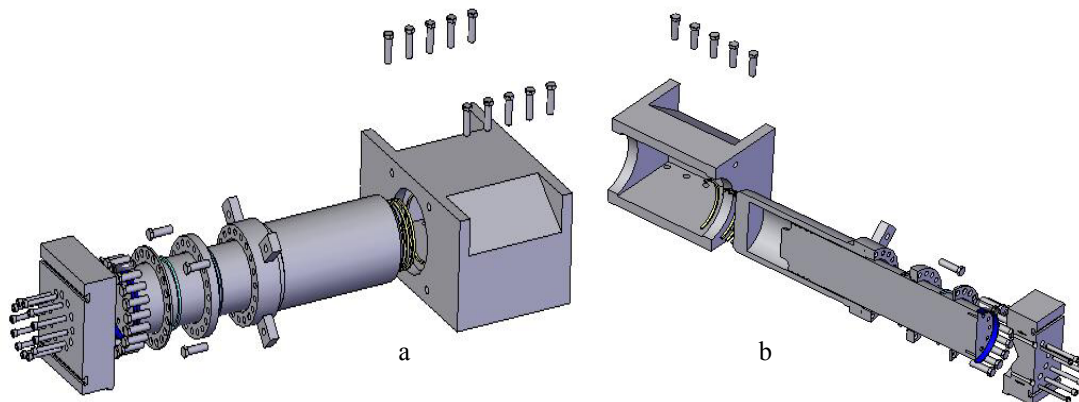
3D exploded representation of: a) the hydraulic element force from horizontal Hydraulic Press – 2 MN; b) a longitudinal section in the hydraulic element force from horizontal Hydraulic Press – 2 MN.
